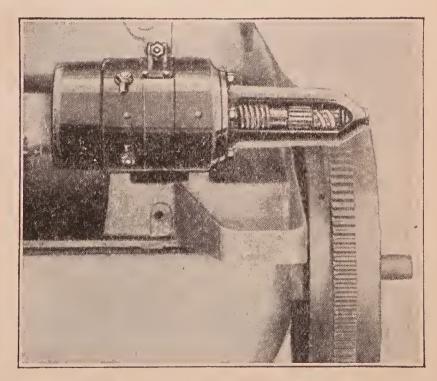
Automatic Engagement and Release of Starting Motor, Overland Engine
